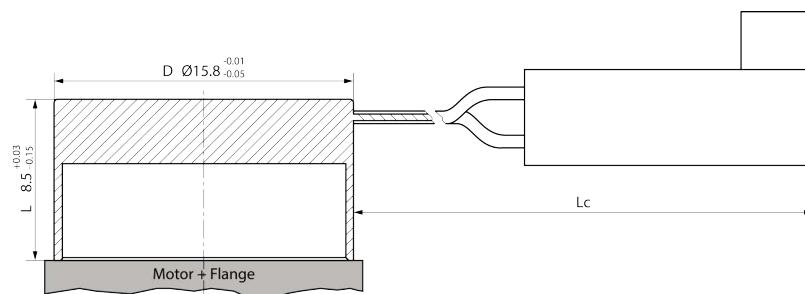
ENX 16 EASY XT – Dimensional Drawing [mm]
